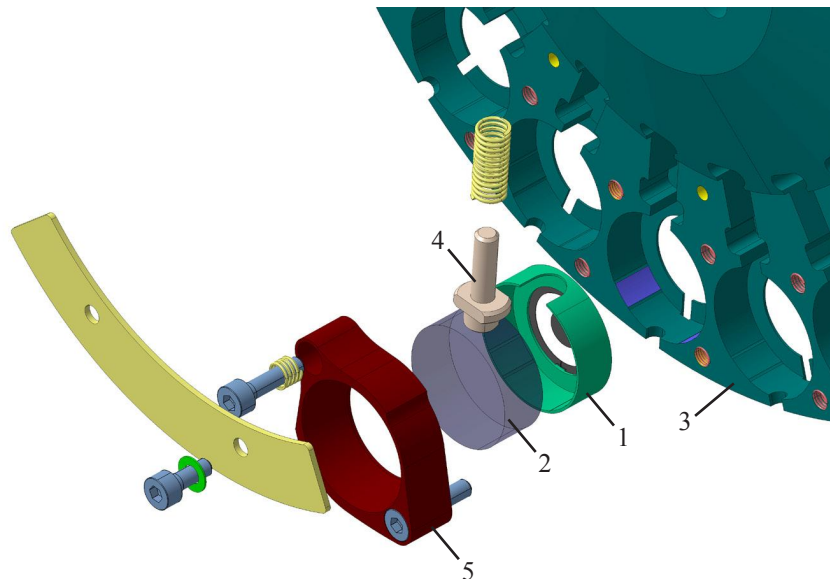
Exploded view of a pupil mask (1) combined with a filter element (2) mounted in the pupil wheel (3). A spring-loaded pin (4) and a filter/mask holder (5) provide the kinematic fixation of the elements.
